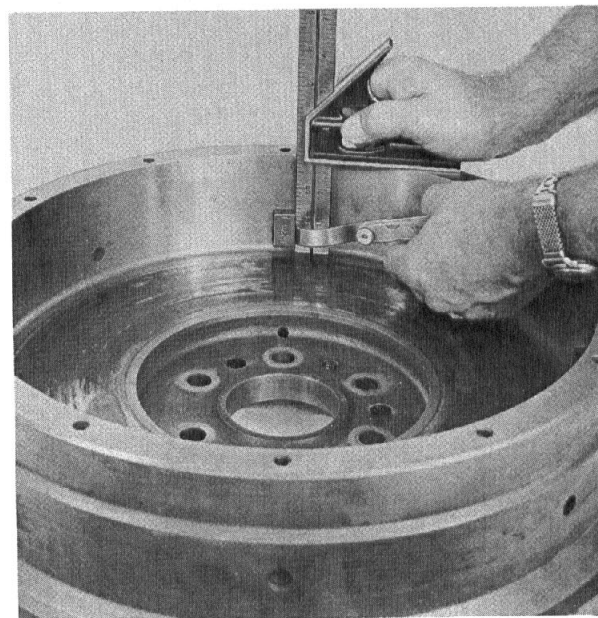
Aligning Drive Pins in Flywheel Using Machinist Square and Feeler Gauge.
